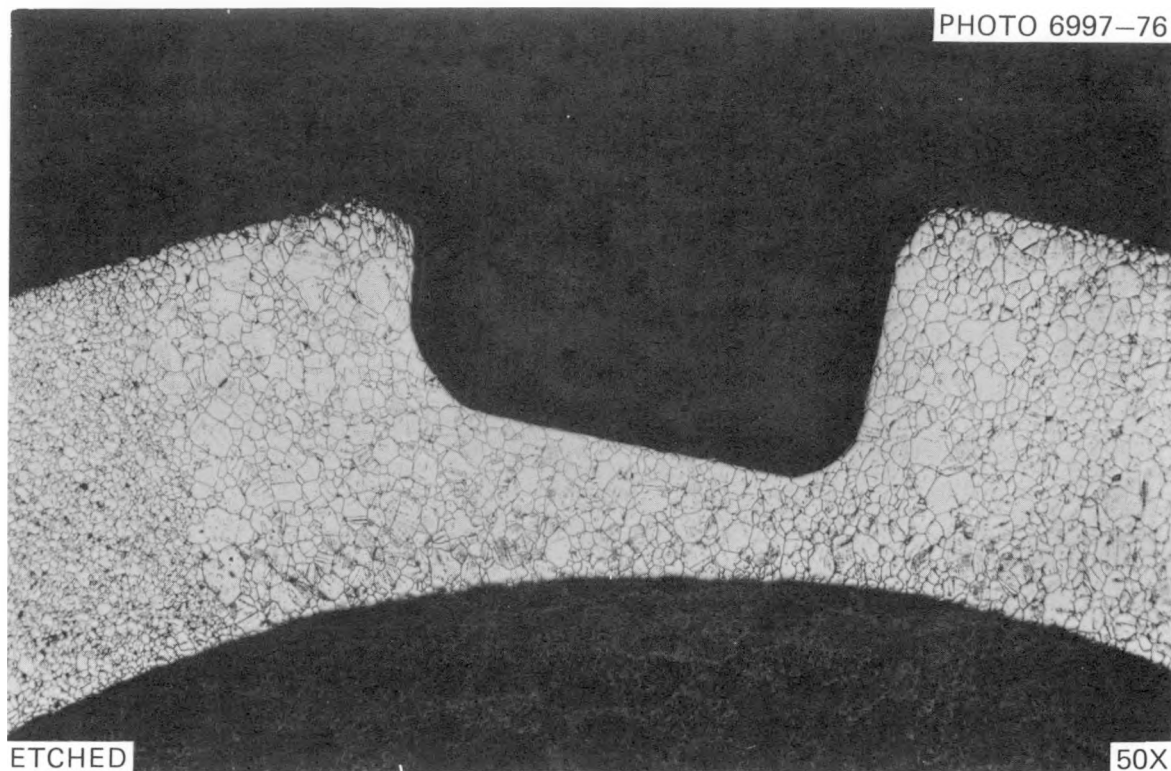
Groove 3 in unheated region of fuel simulator 2828016 showing improper machining.
